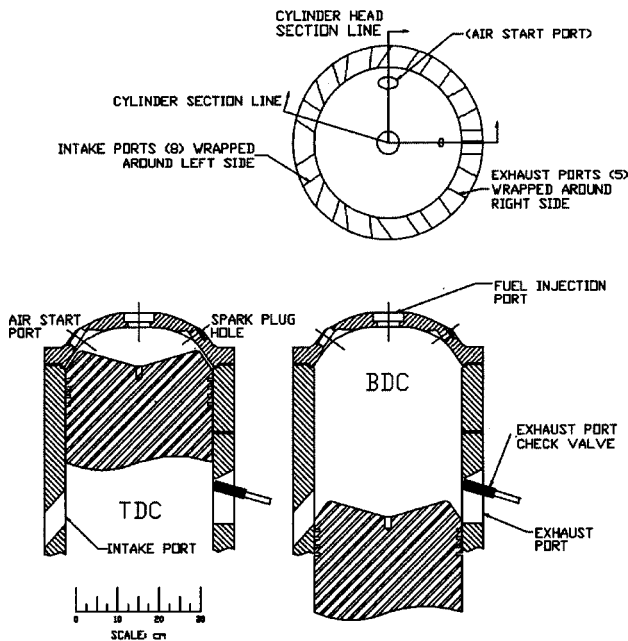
Piston and cylinder for GMV-4TF showing the spark-plug hole and air-start, intake, and exhaust ports
